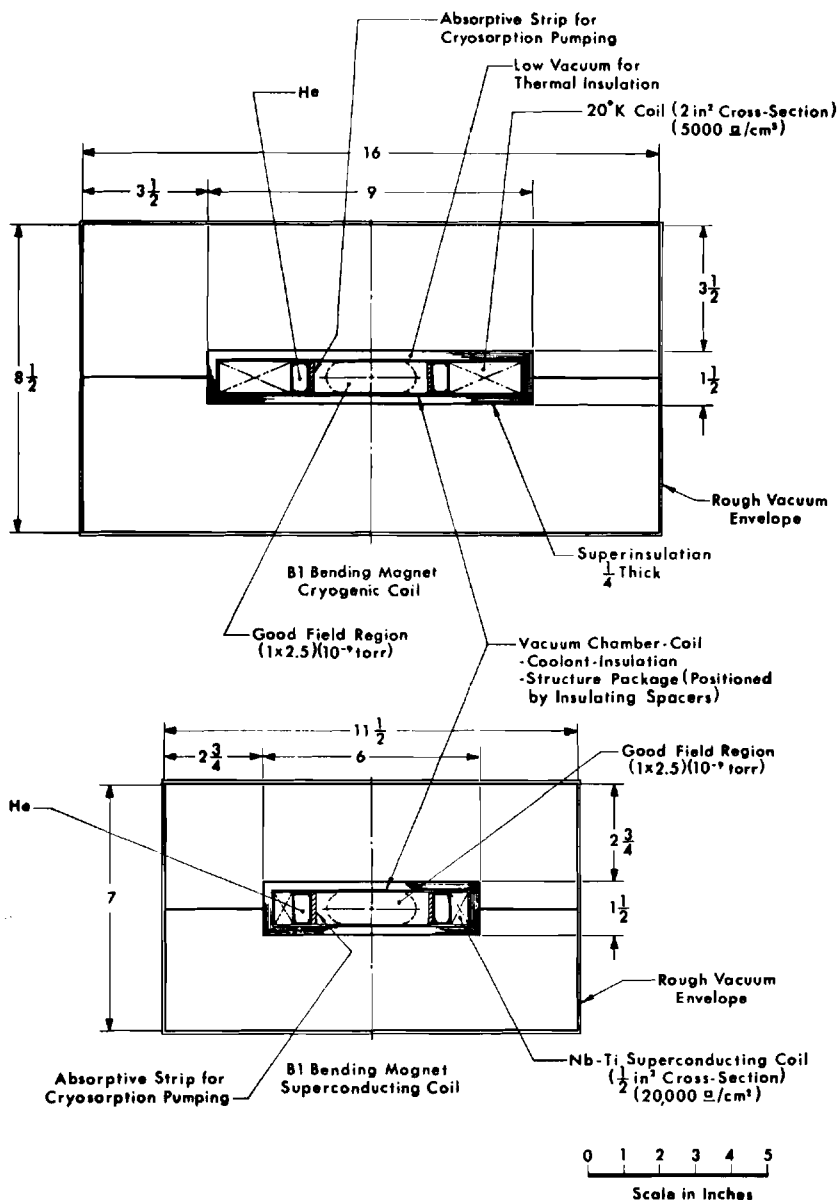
Top: Cross-Section of Bending Magnet with Iron Yoke and Cryogenically Cooled Aluminum Coils
